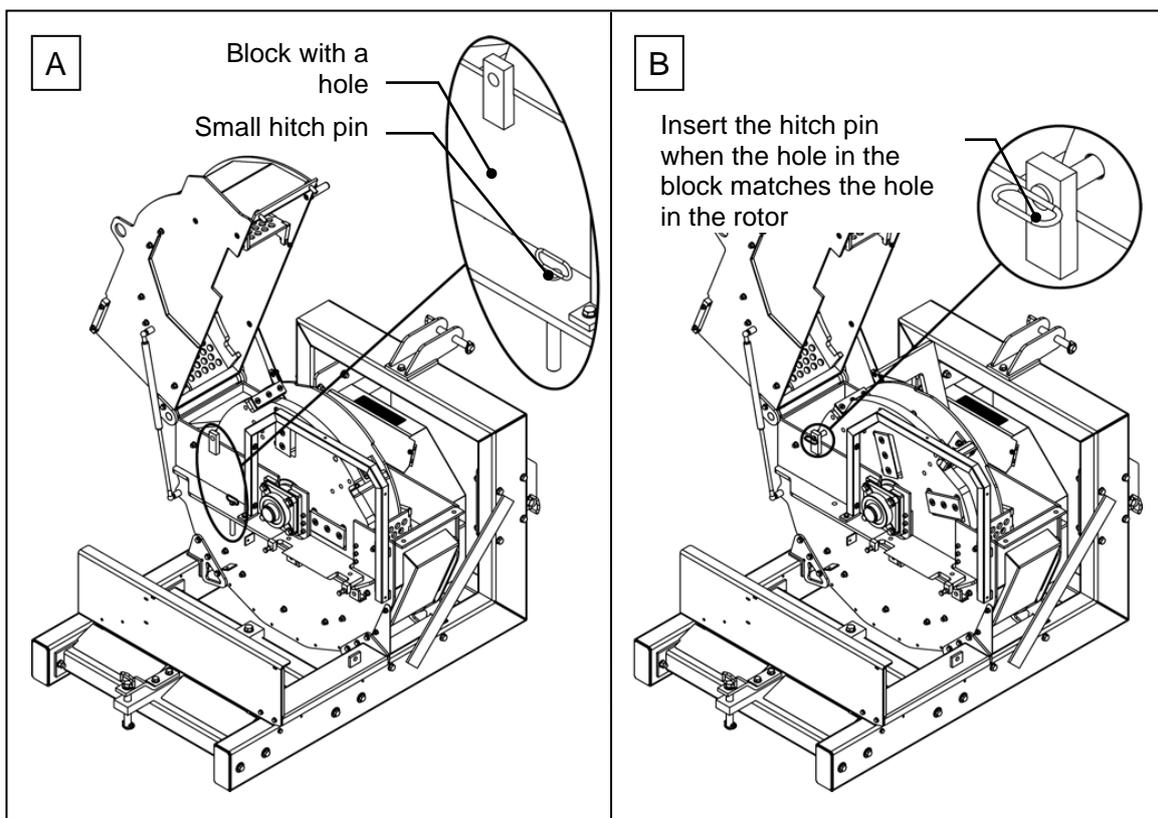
Locking the rotor during blade removal (spout and feeder not shown)
